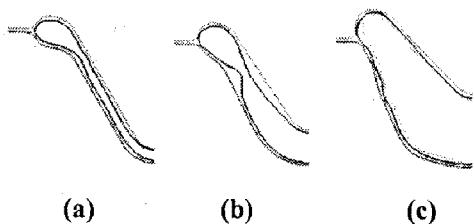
Shape of cross sections of tools and the tube with the initial design after the OP20 stage: at sections (a) A-A'; (b) B-B'; (c) C-C'
